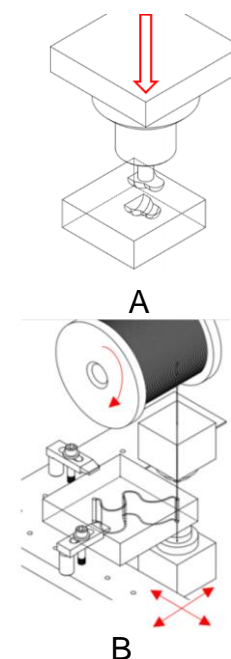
Schematic drawings representing (A) the die sinking electrical discharge machining process and (B) the wire discharge machining process
